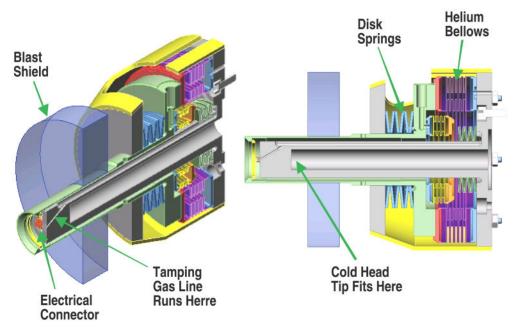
The indirect drive target gripper makes a mechanical, thermal, and electrical connect to the base of the target assembly holder, which contains the target. It seals the tamping gas line to the base.
